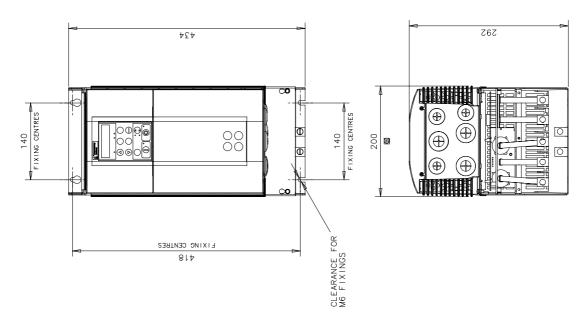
Frame 2: 40A-165A Stack Assembly
